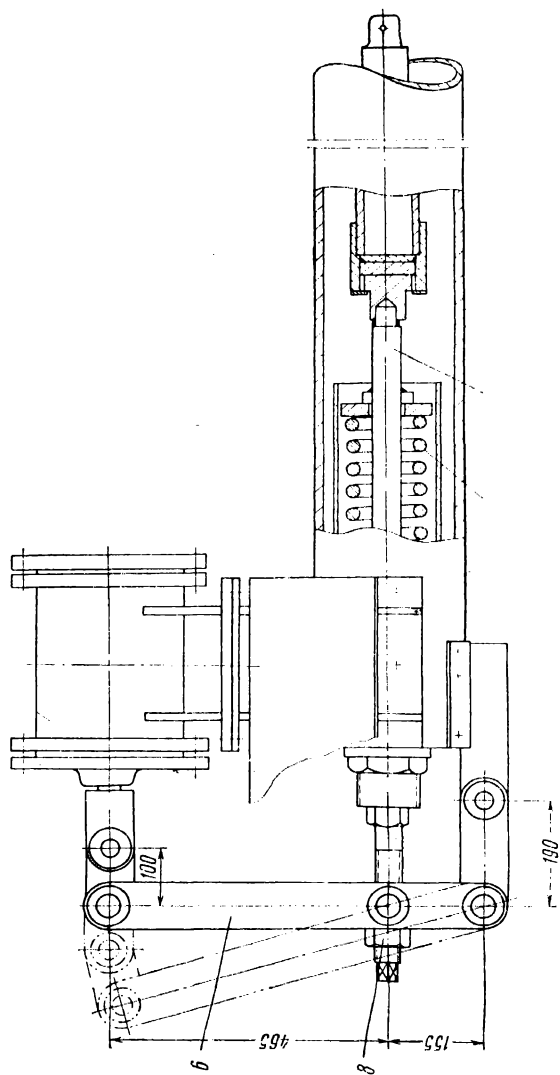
Spring pneumatic clamp for a 300-mm electrode:
